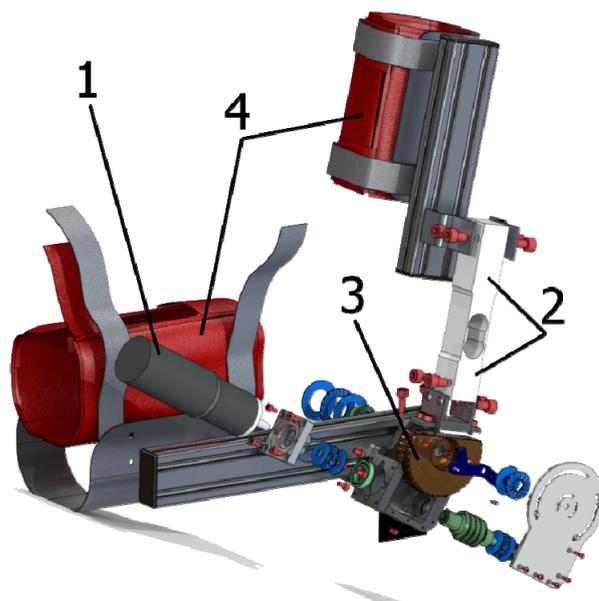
Exploded view of the orthosis. 1 – actuator, 2 – strain gauge sensor, 3 – worm gear, 4 – vacuum pads
